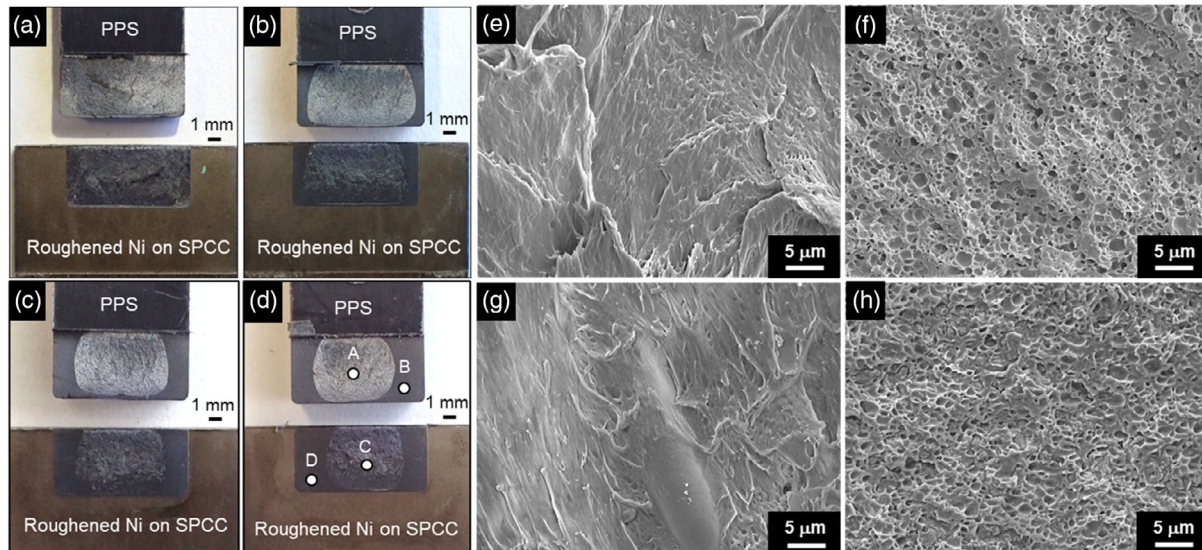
Fracture surfaces of the bonding samples before and after the heat shock testing. a) Photograph of the fracture surface before the test. b–d) Photographs of fracture surfaces after 200, 500, and 1000 cycles, respectively. e–h) SEM images at points A, B, C, and D in (d), respectively.
